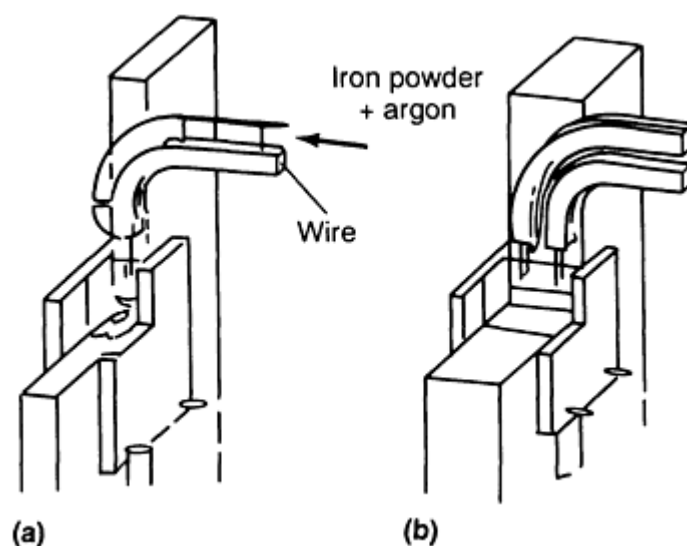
EQUIPMENT SETUP FOR SQUARE-GROOVED HIGH-SPEED WELDING WITH METAL POWDER ADDITION. (A) PLATE THICKNESS OF 10 TO 40 MM ($\frac{3}{8}$ TO $1 \frac{9}{16}$ IN.). (B) PLATE THICKNESS OF 40 TO 100 MM ($1 \frac{9}{16}$ TO 4 IN.). SOURCE: REF 25
